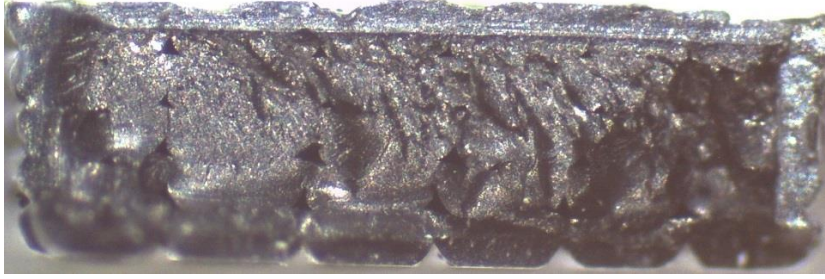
Fracture surface of a sample printed with 0.8 mm nozzle diameter and 0.53 mm line width
